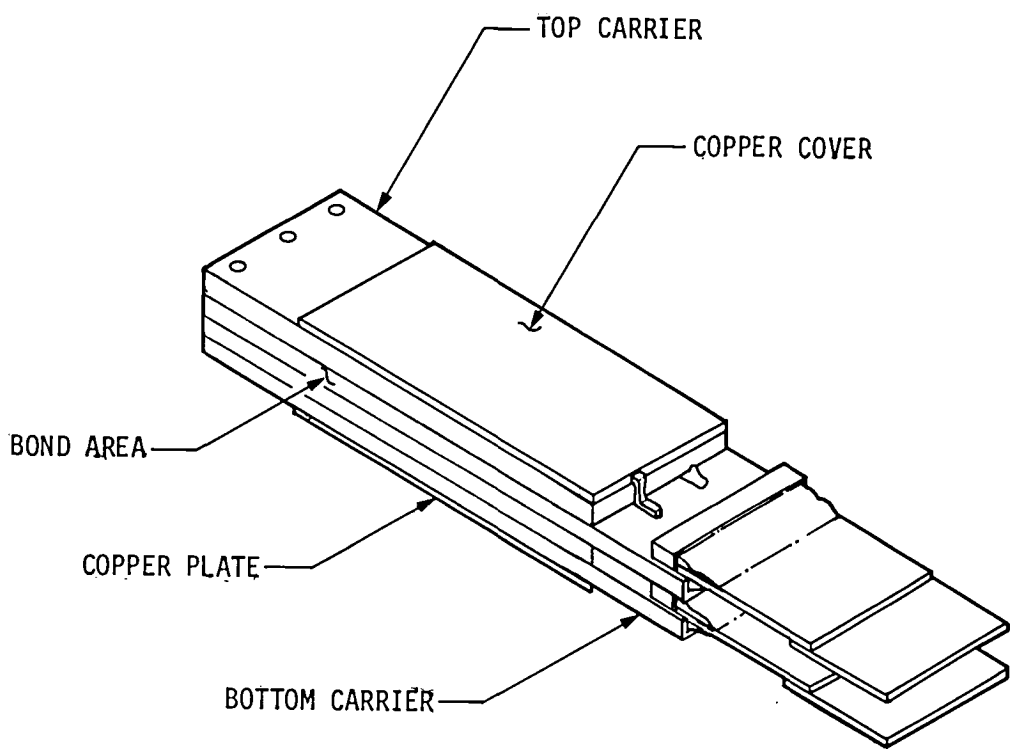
DUAL CARRIER ASSEMBLY
